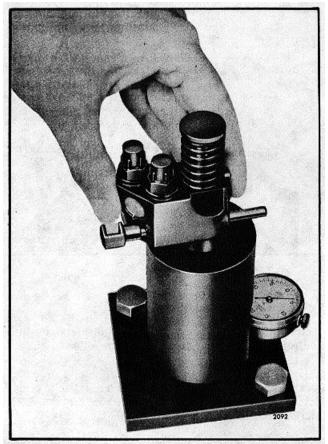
Checking Injector Spray Tip Concentricity using Tool J 29584
